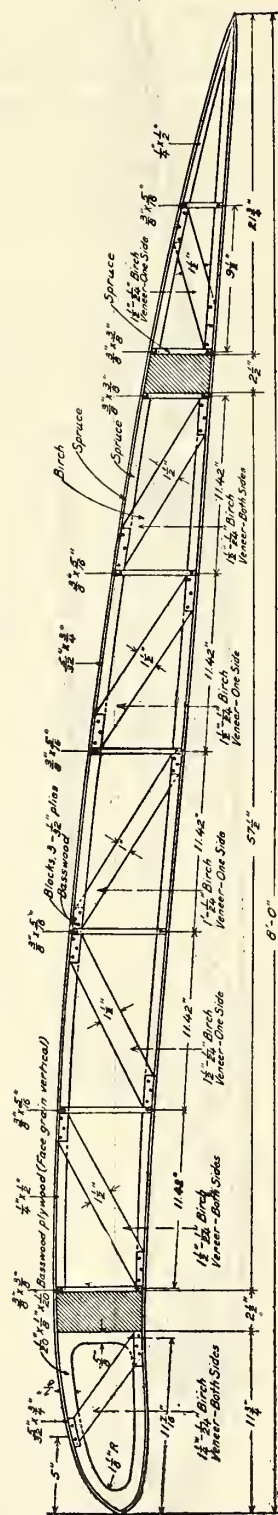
Pratt truss type wing rib for F5-L machine.
